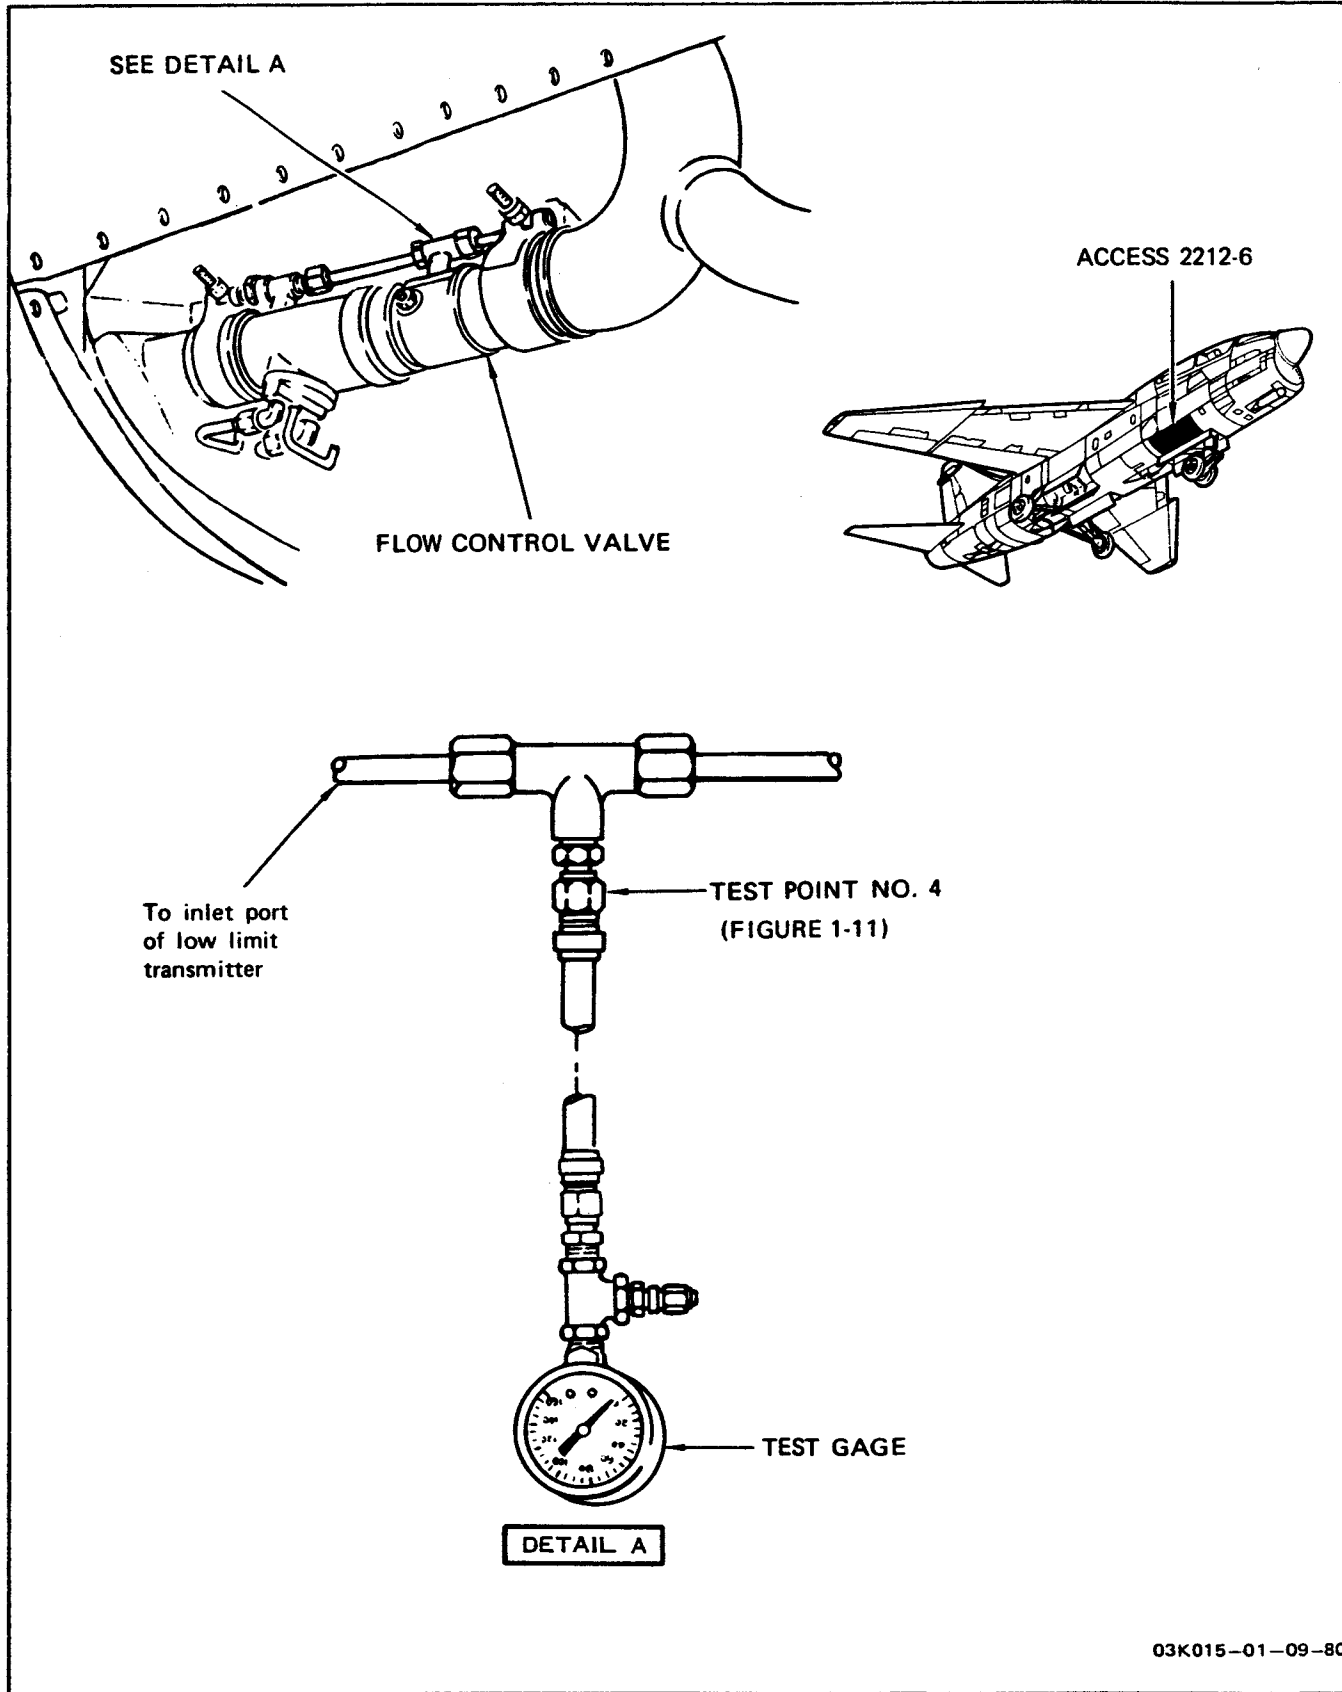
Test Gage Placement (Sheet 3 of 7)
